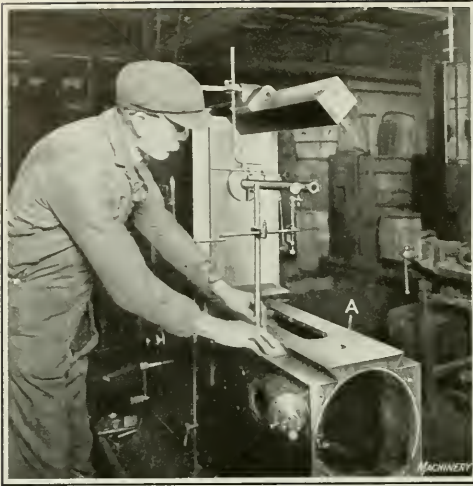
Test Bar and Indicators used in testing the Spindle Bearings and the Over-arm Bearings in Relation to the Knee Bearings
